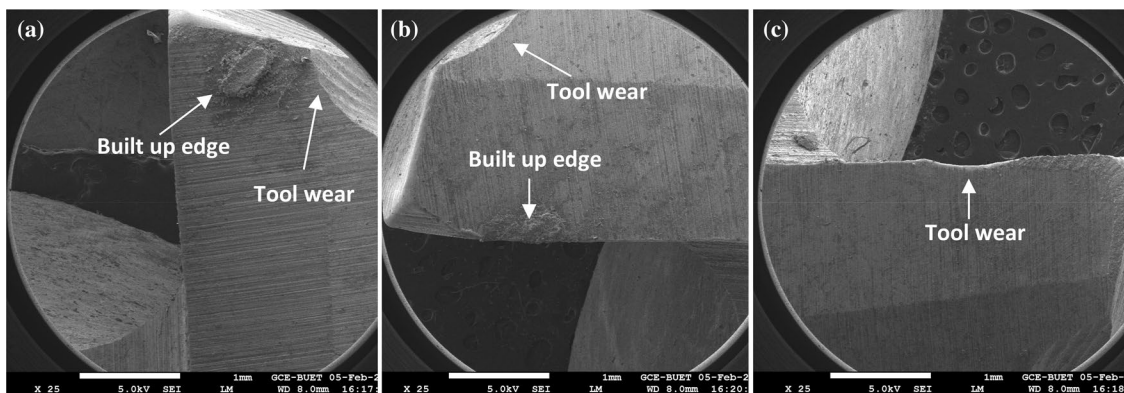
SEM images of milling cutter after machining (a) in Dry (b) with conventional cutting fluid (c) with machining nanofluid
